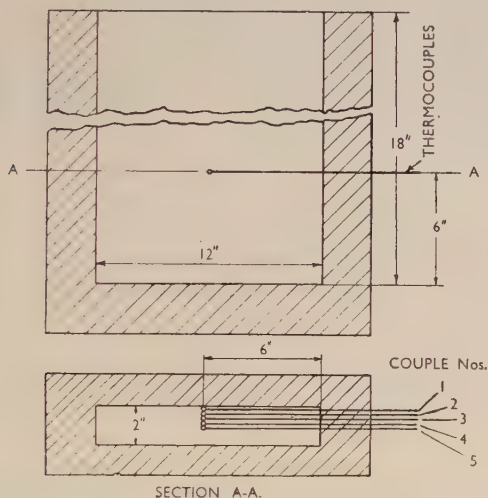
Details of Mould and Positions of Thermocouples in 18 × 12 × 2 in. Slab Casting.
